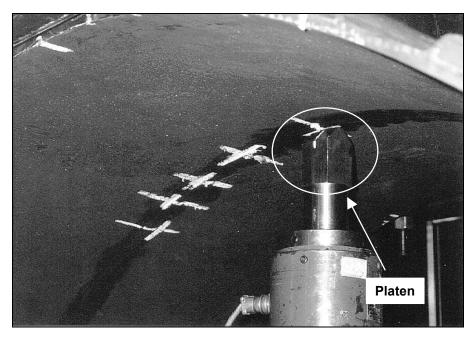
Position of the Platen Adjacent to the Butt Weld Prior to Dynamic Loading
